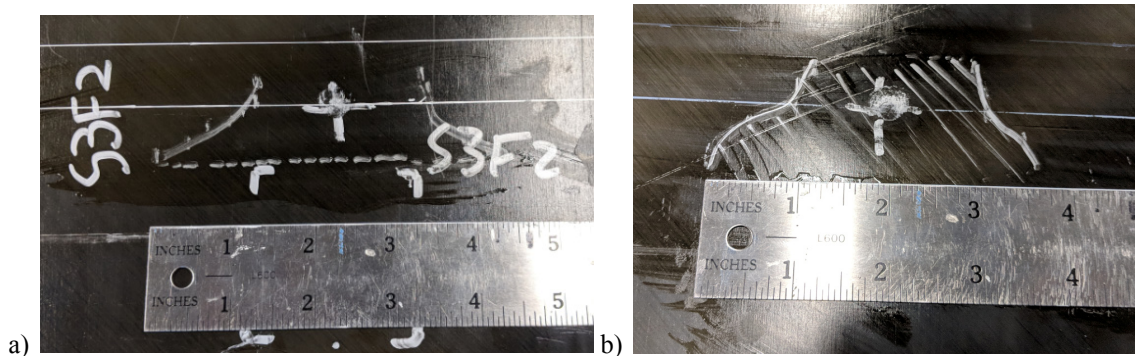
Handheld A-scan measurement of impact damage extent for flange impact case. a) Specimen S3F2, 82.7 J impact case. b) Specimen S4F2, 64.8 J impact case.
